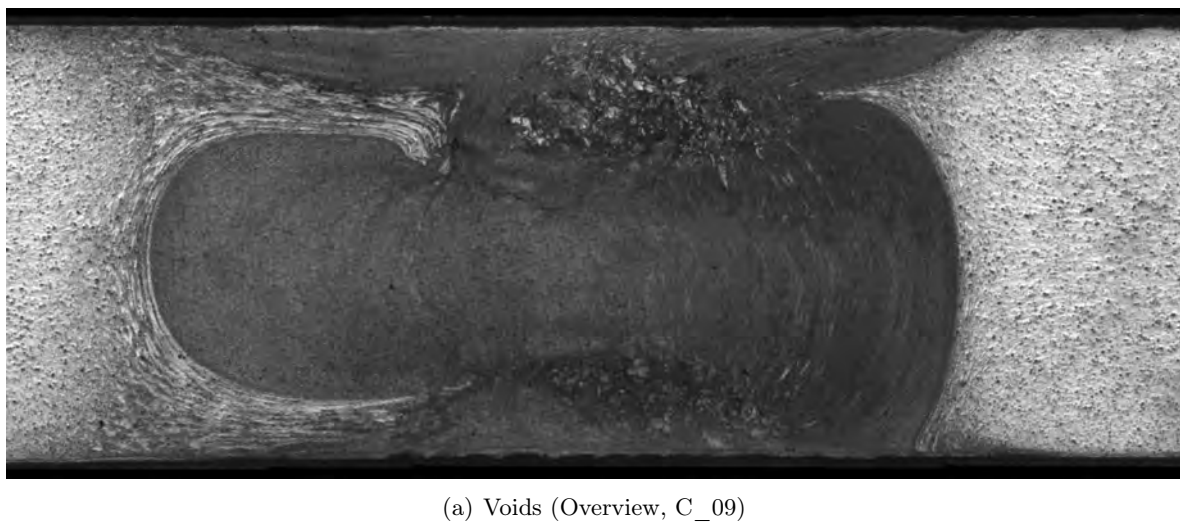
Typical defects in the microstructure of joints welded with the baseline tool
